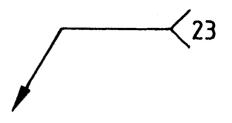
INDICATION OF WELDING PROCESS
